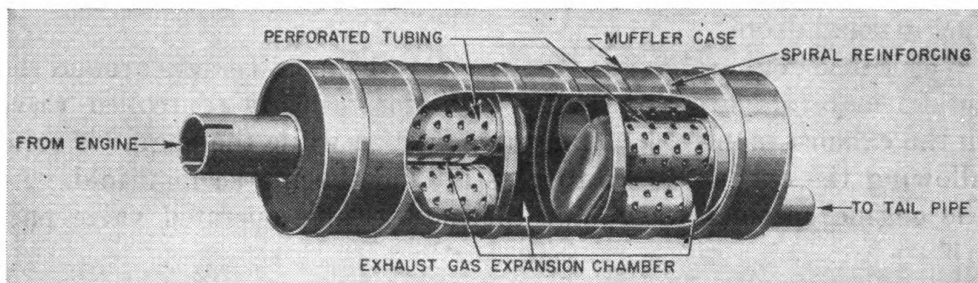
Spiral type exhaust muffler with expansion chambers.
